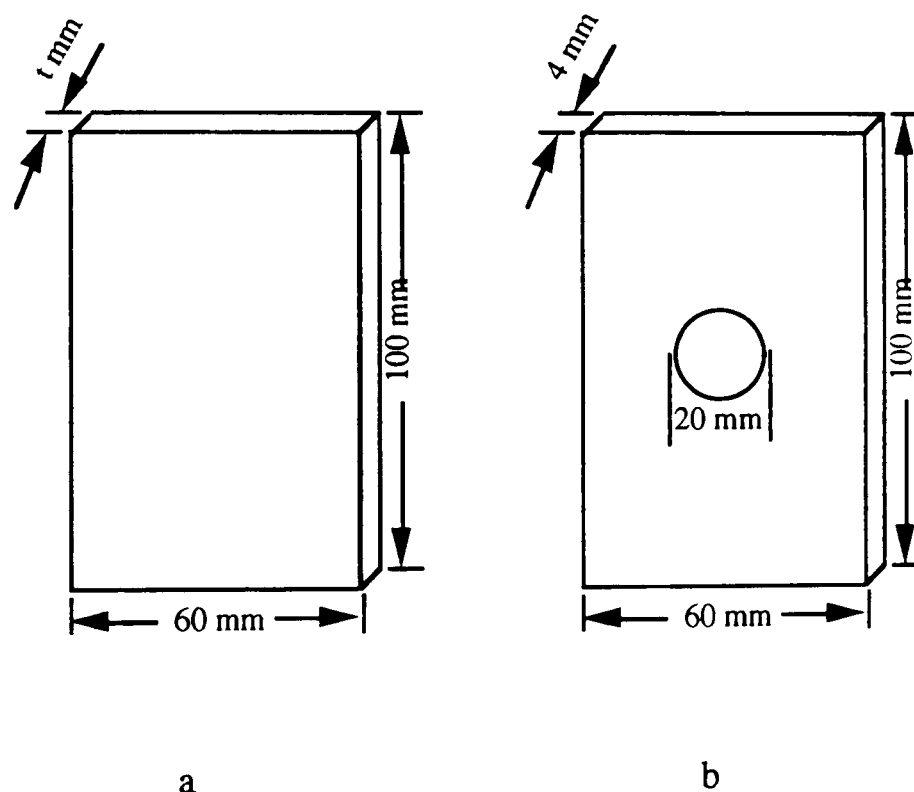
Geometry and nominal dimensions of the specimens used for measuring the tensile residual strength after impact a) without hole, b) with a 20 mm diameter hole
